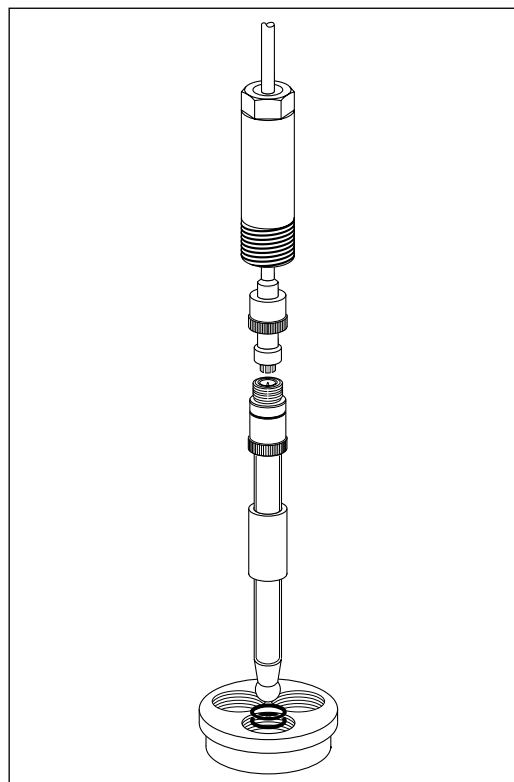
Standard mounting with mounting set FP20-R12(M), FP20-S12(M)
